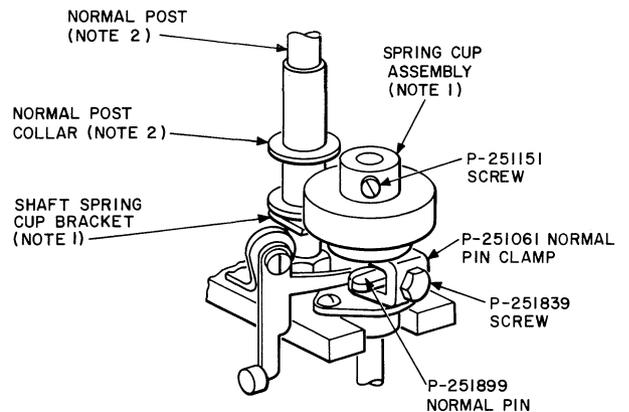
Cup-Type Shaft Spring Assembly and Associated Parts - Assembly with Normal Post Collar
